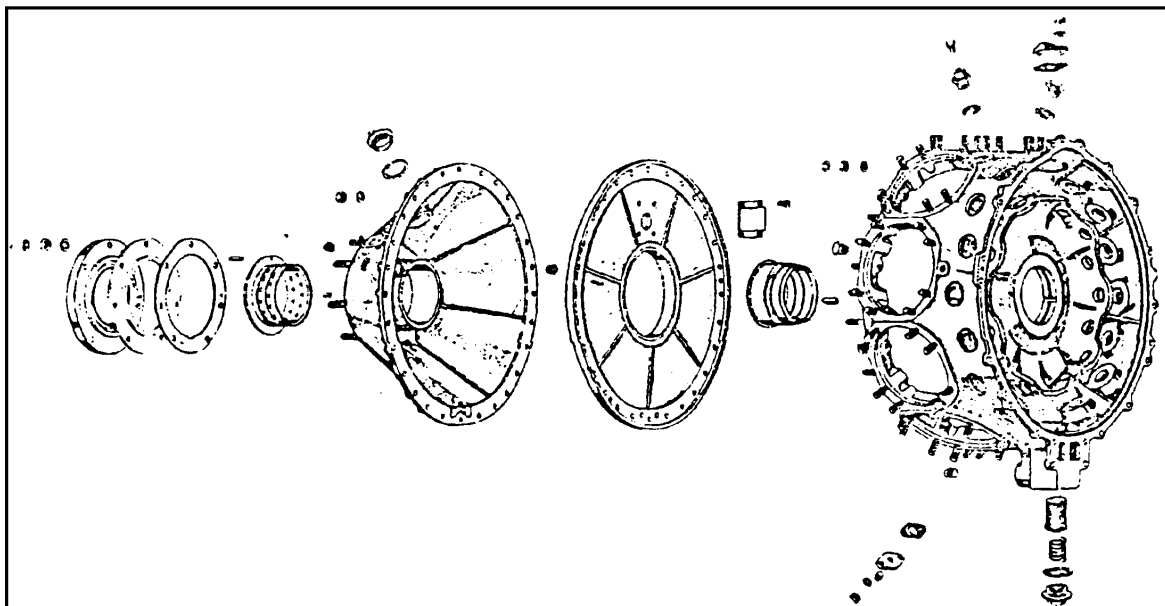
Crankcase Front Section (Without provision for mounting propeller governor), Main Bearing Support, and Main Section
